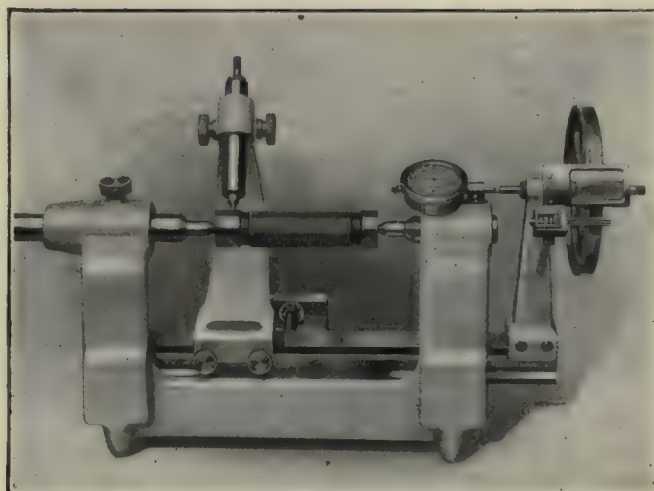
FRONT VIEW OF "LEA" THREAD-TESTING MACHINE
